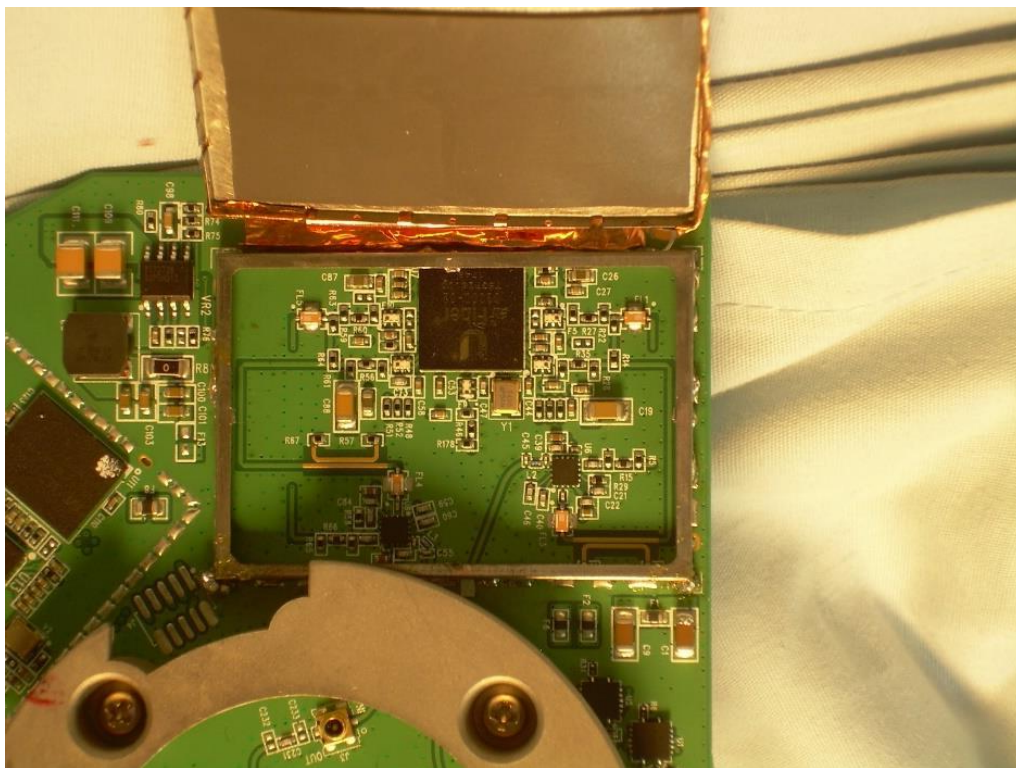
Internal Front View of the EUT with Reflector Removed
